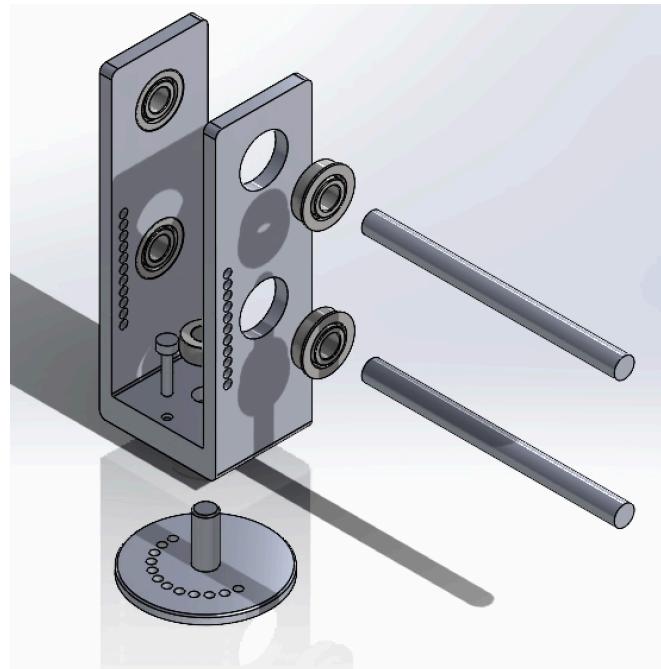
Exploded view of Fulcrum assembly to illustrate assembly techniques.
